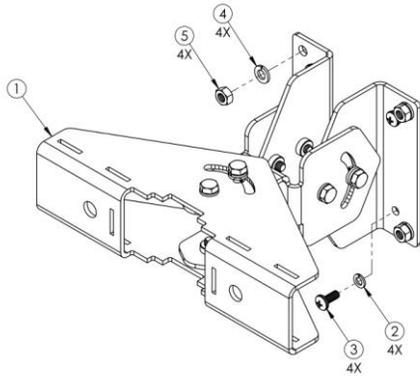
2-Axis Adjustable Mast Bracket Shown With Horizontal Alignment at 0°
